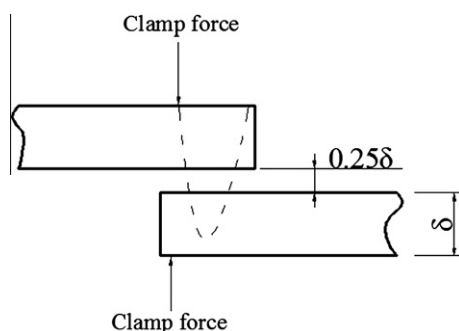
Assembly precision and clamp mode of laser-welding overlap joint.
